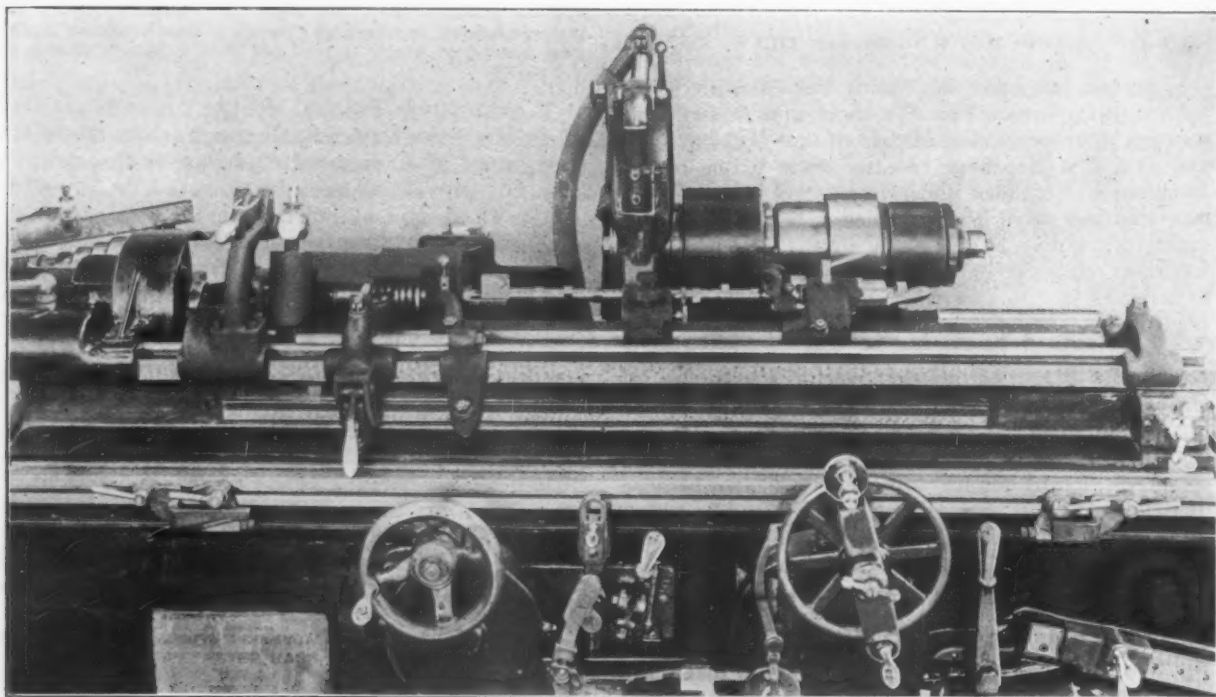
Internal Cam Grinding Attachment, Front View.
